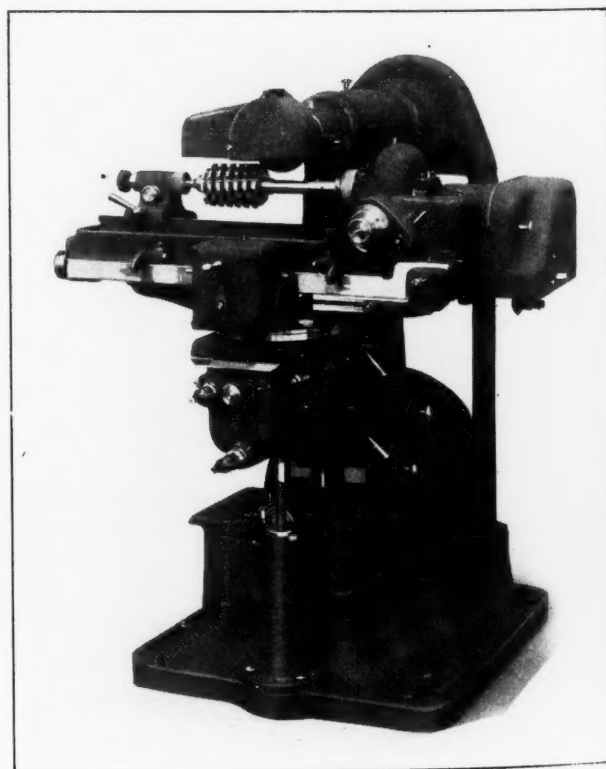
Hob Sharpening Machine Built in Semi-automatic and Full-automatic Models
